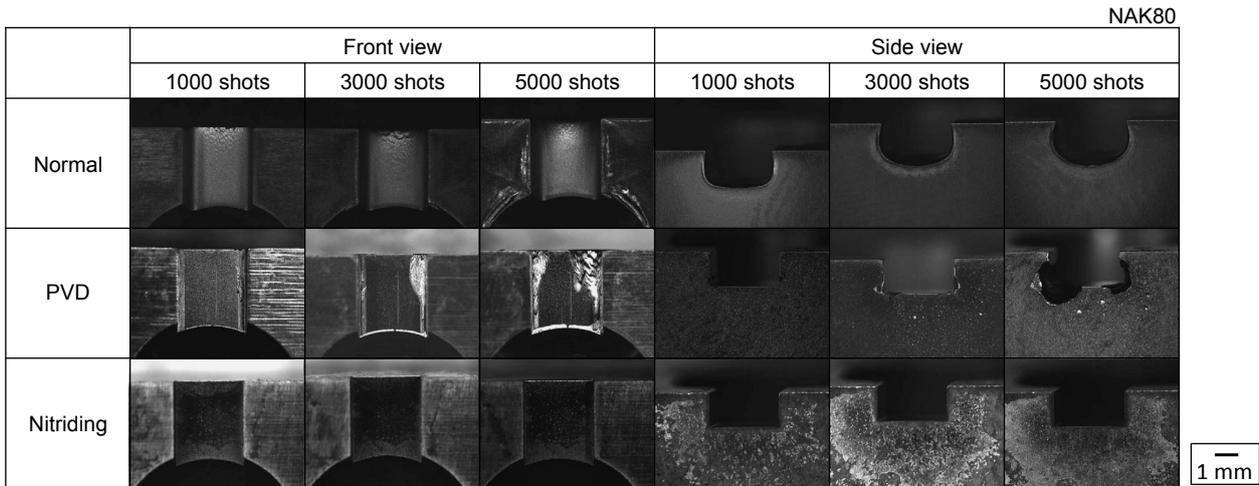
Front and side view of mold wear (NAK80) in different surface treatment.
